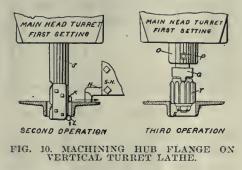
MACHINING HUB FLANGE ON VERTICAL TURRET LATHE.
